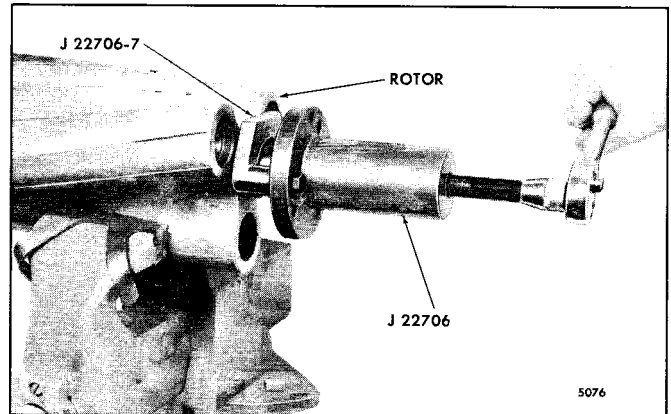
Removing Oil Seal Ring Carrier from Blower Rotor Shaft
